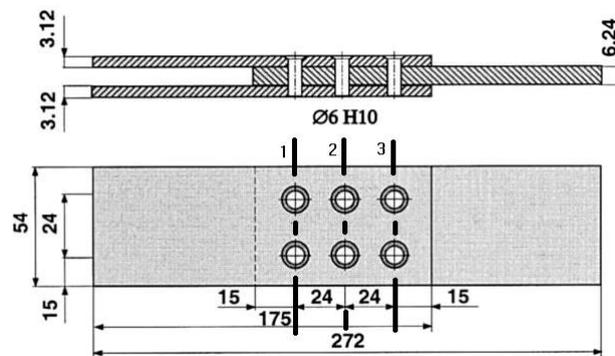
Dimension of test specimens with three row-bolt double-lap joint
